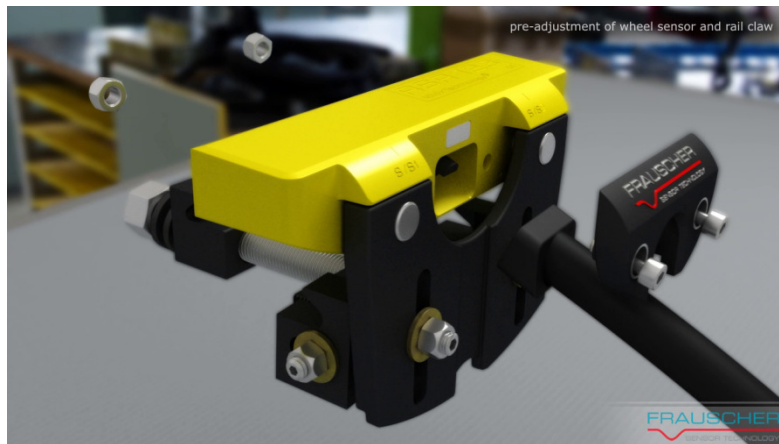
Fast and easy mounting of a sensor using rail claws and plug-in cables
